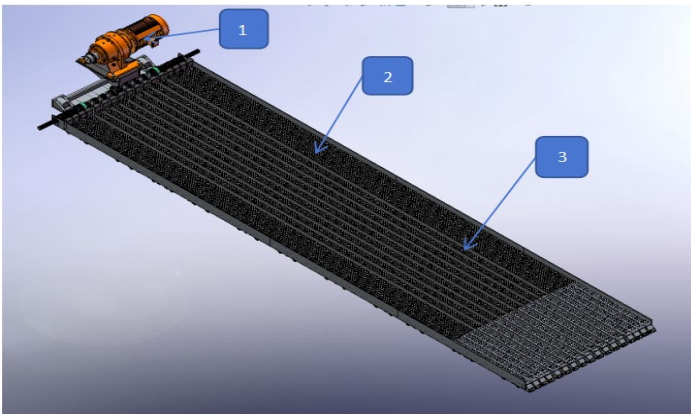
Pusher plateMaterial Chain Conveyor Drives 2.Material chain conveyor 3.Pusher plate
